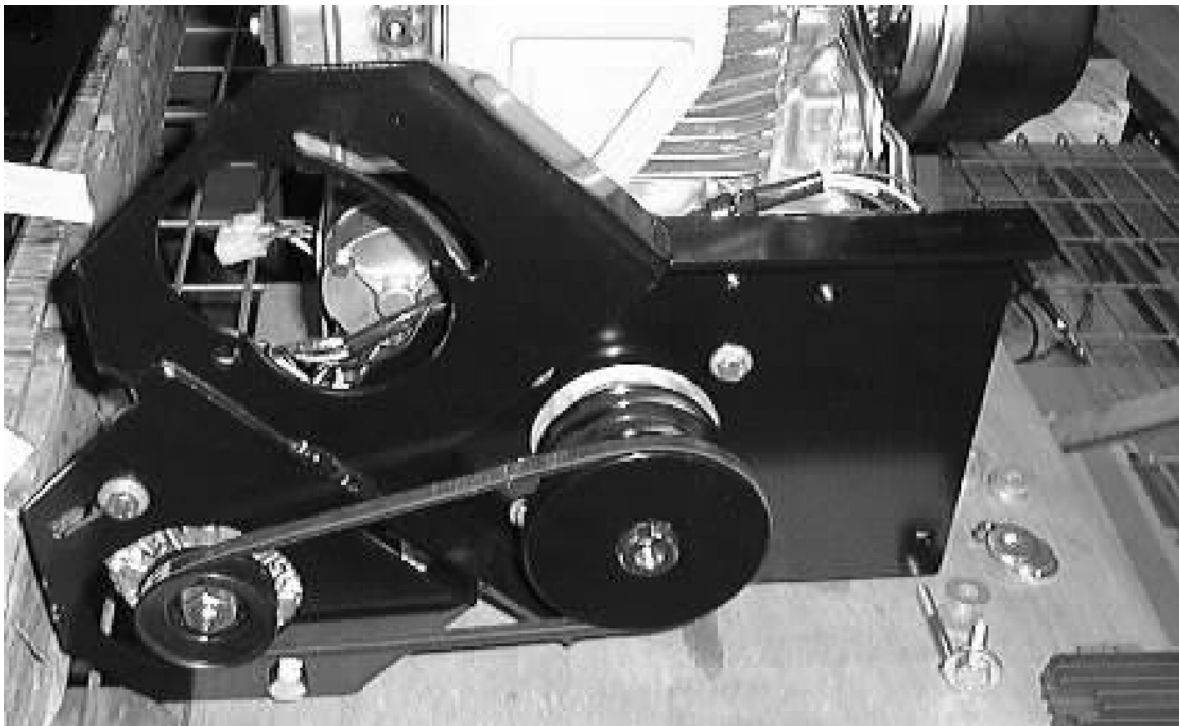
NEW ALTERNATOR/MOUNTING PLATE ASSEMBLY
